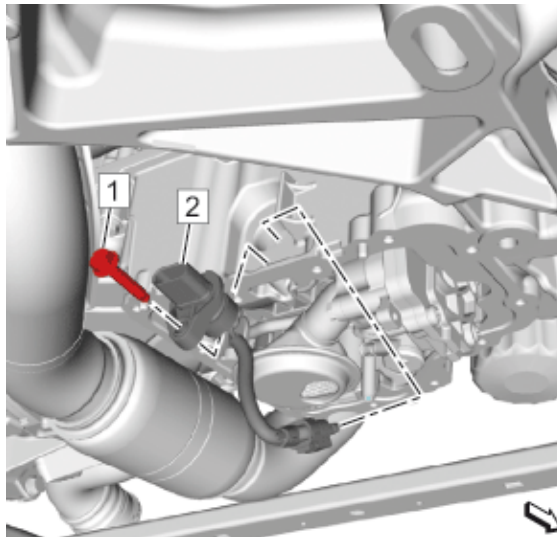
Engine Oil Level Indicator Control Module, Wiring Harness And Bolt
